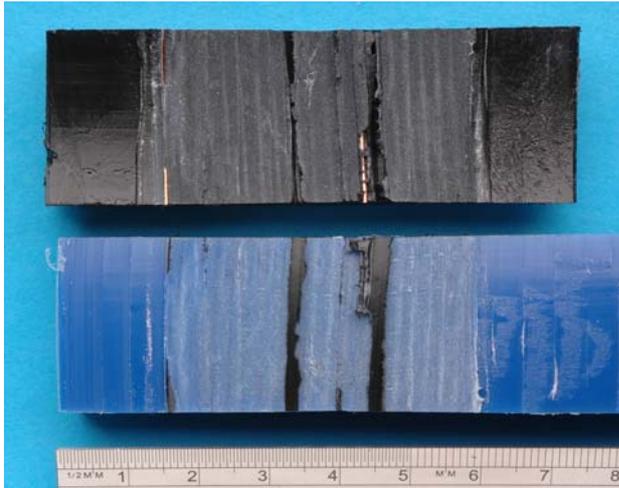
Fig.IV Fracture surface of ISO peel decohesion test specimen containing talc contamination.
